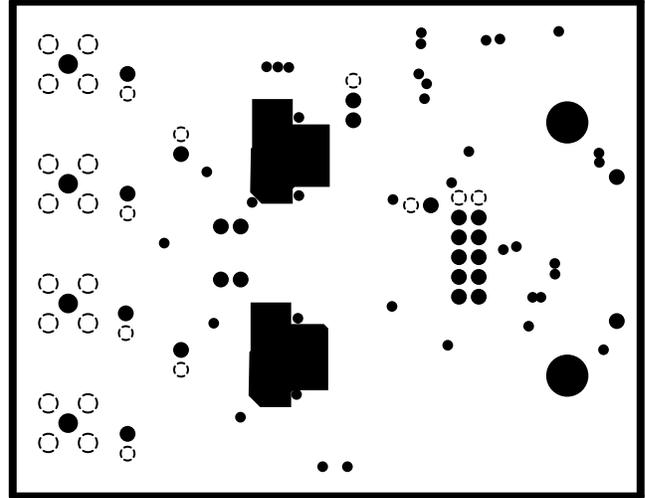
ADS8354EVM PCB Layer 2: GND Plane
